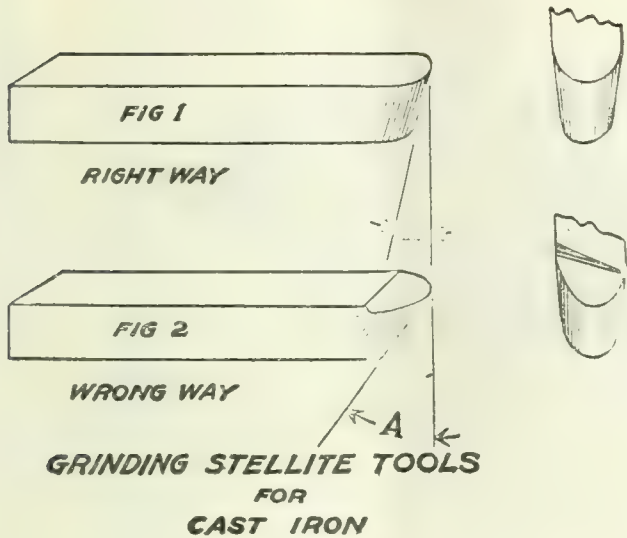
shows the right way to grind a Stellite tool for machining Cast Iron. Give the tool a full Round Nose, and be sure the angle (A) is just sufficient to allow the tool to clear the work. This angle should never be more than six degrees.
